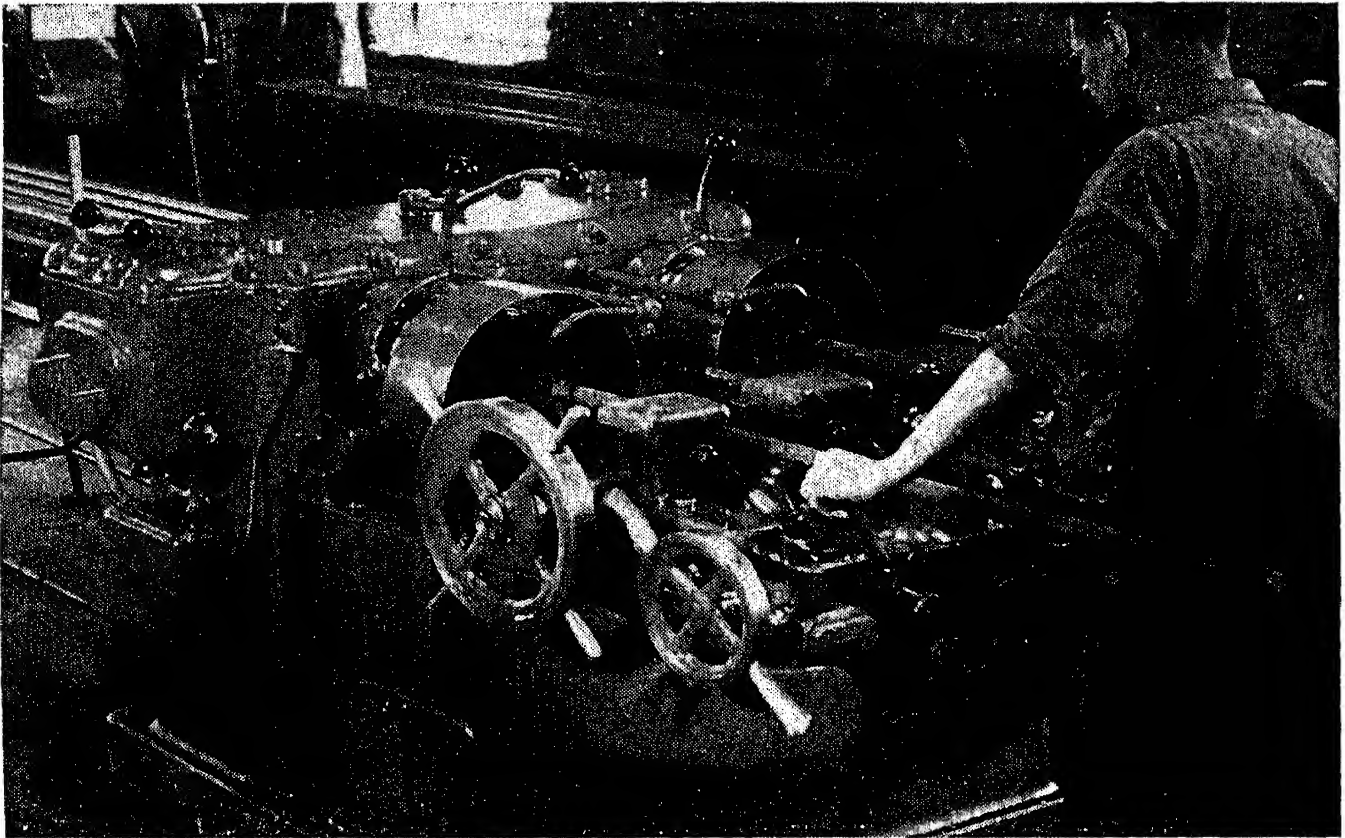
A threading machine with two heads. (Courtesy Landis Machine Co.)
